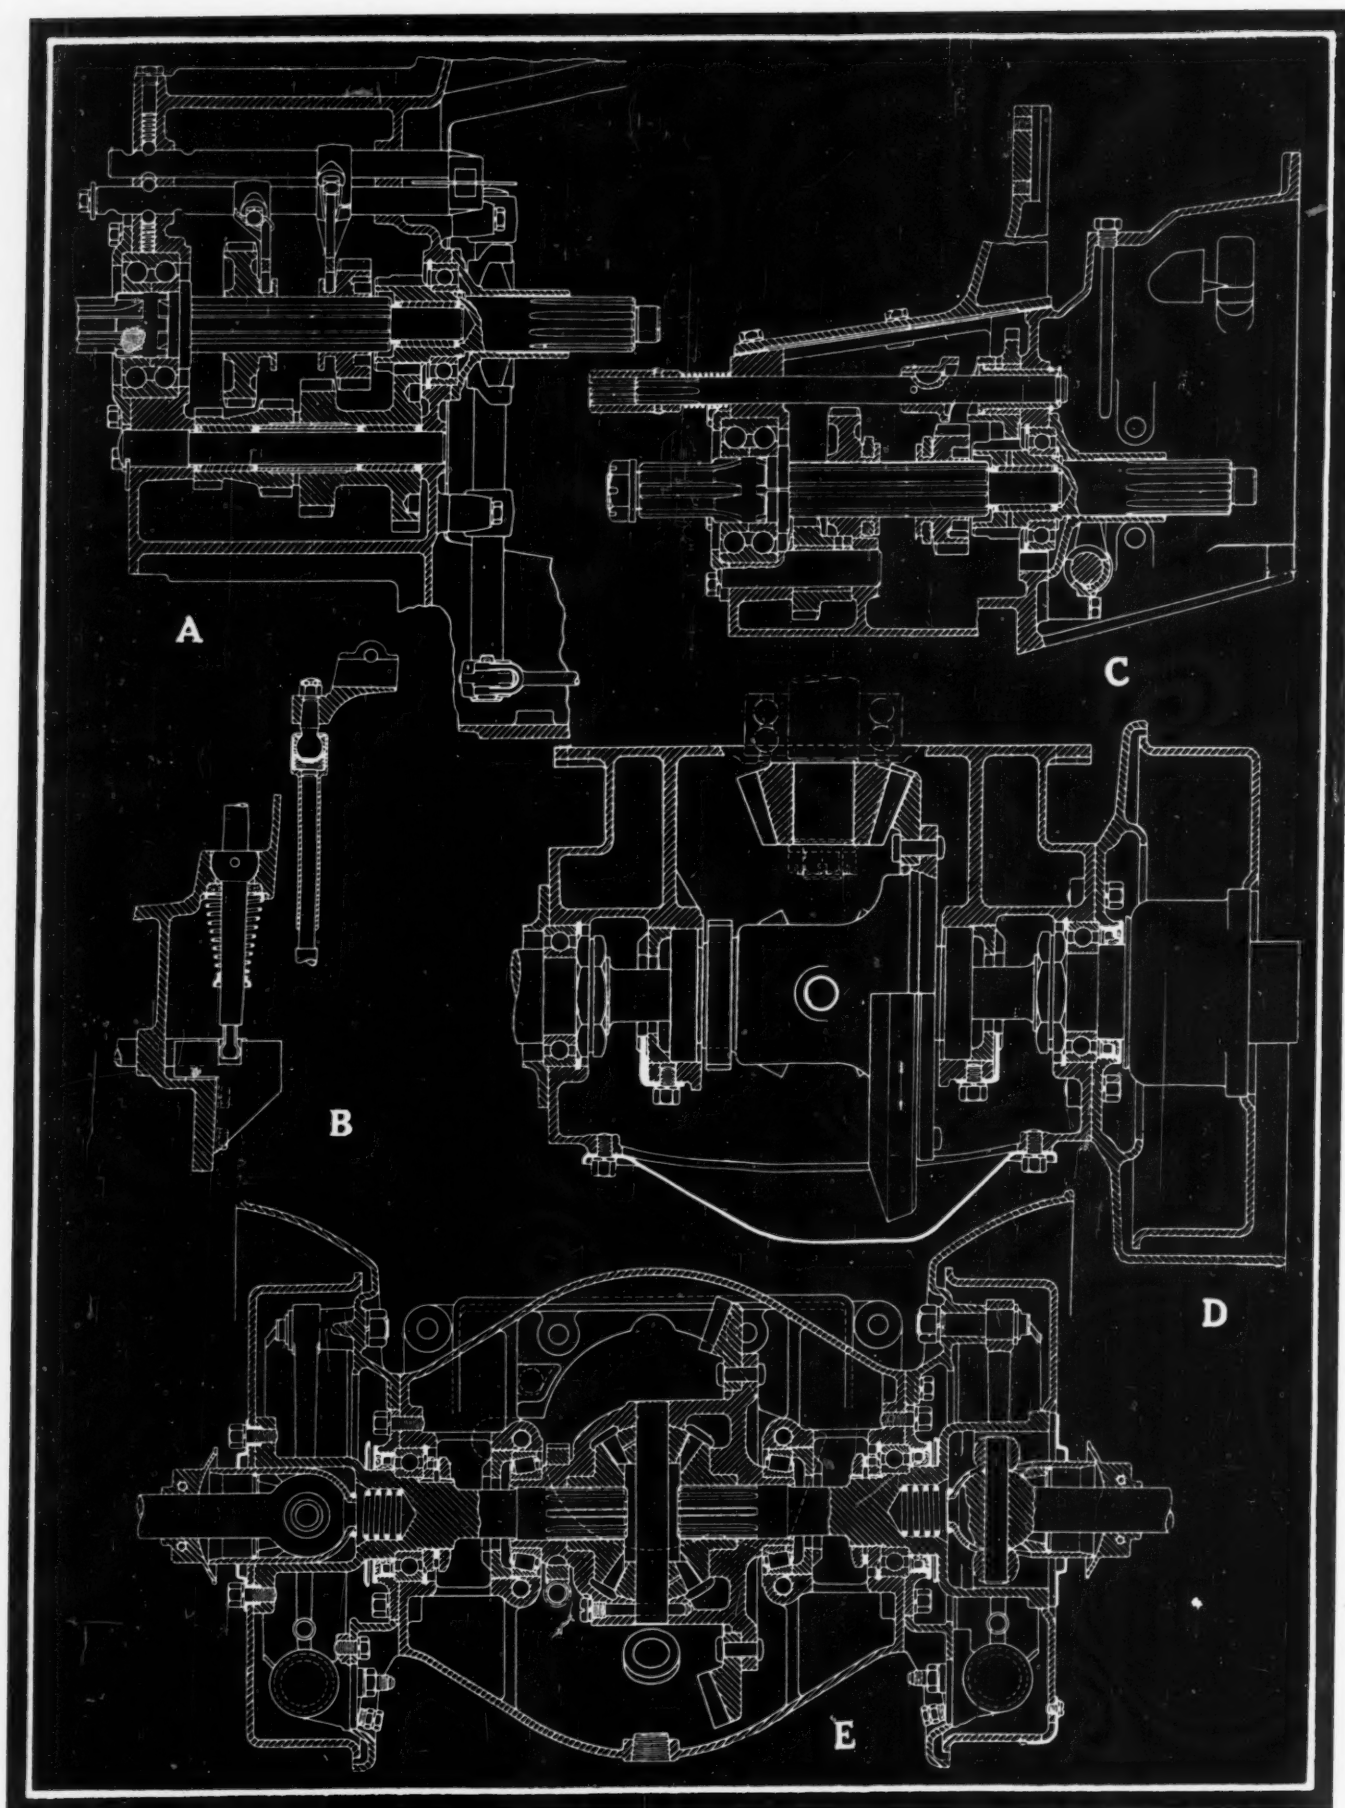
Cord transmission details, showing: A, mainshaft and countershaft; B, ball mounted lever which engages front end of shift rod; C, cranking shaft above mainshaft; D, hypoid pinion on end of mainshaft; E, ball trunnion-slot type slip joints and differential
